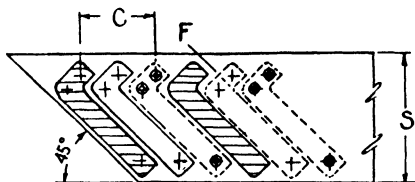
Another and a better scrap-strip design for the L-shaped blank shown in Fig. 15.
